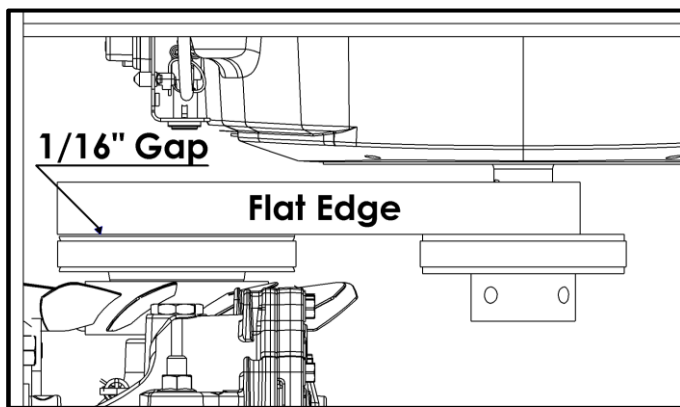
Engine Pulley Alignment to Transaxle Pulley
